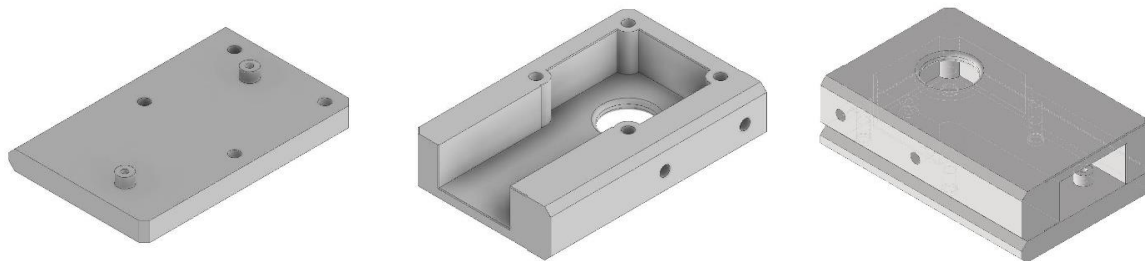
Finalised webcam mount (left), webcam shroud (middle) and the final assembly of the two parts (right)
